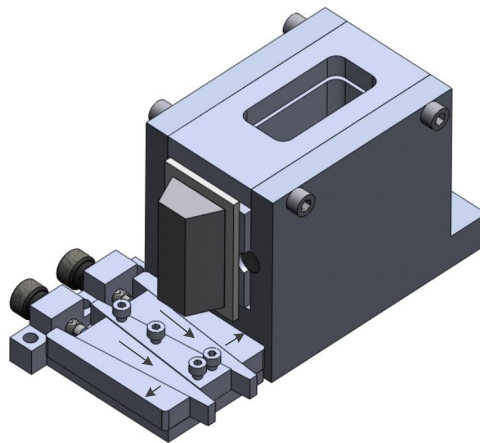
Displacement Wedge Pushing on Stator Slide Assembly
